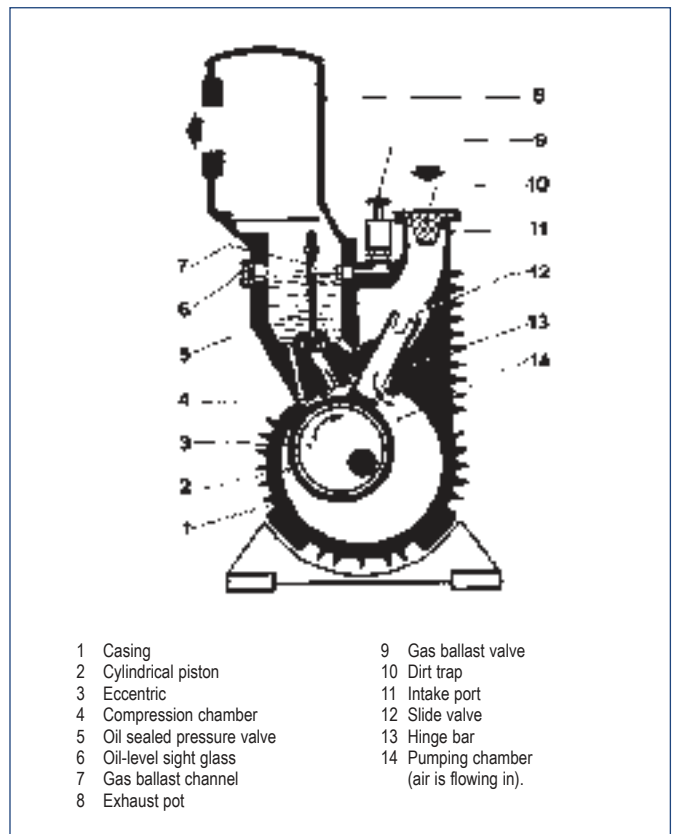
Cross section of a single-stage rotary plunger pump (monoblock design)
